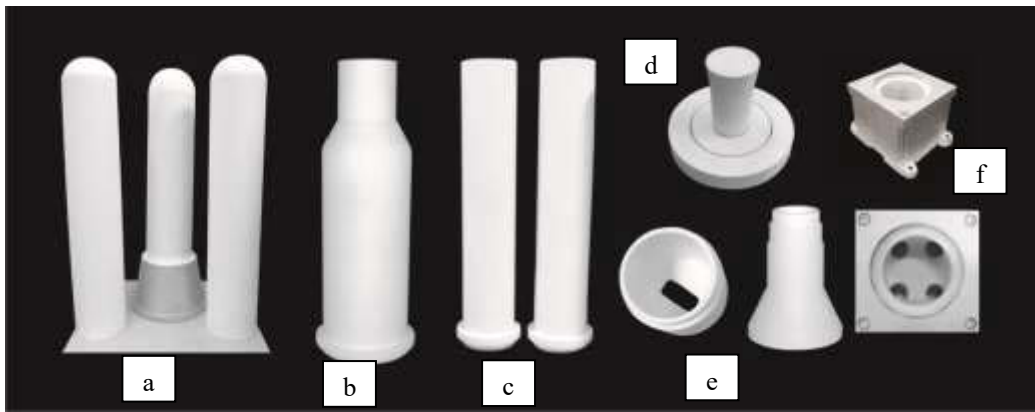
CUMITHERM[®] products a) Dosing tube, b) LPS tube, c) Riser tube, d) Tapping plug and ring, e) Sprue bushes and f) Feeder box assembly.
